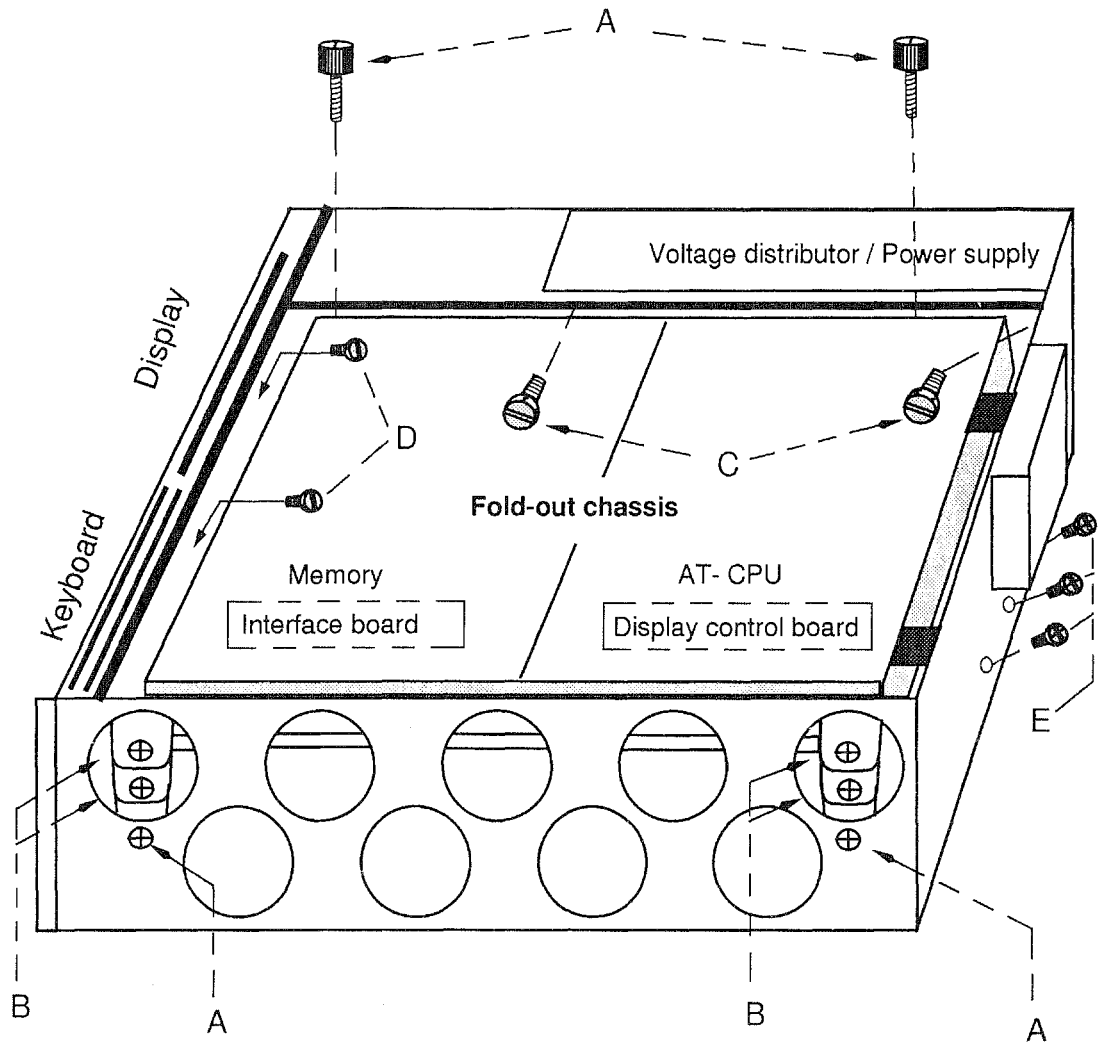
Diagram of instrument showing screws securing the fold-out chassis and the power supply and synthesizer modules (fold-out chassis screening cover removed).
